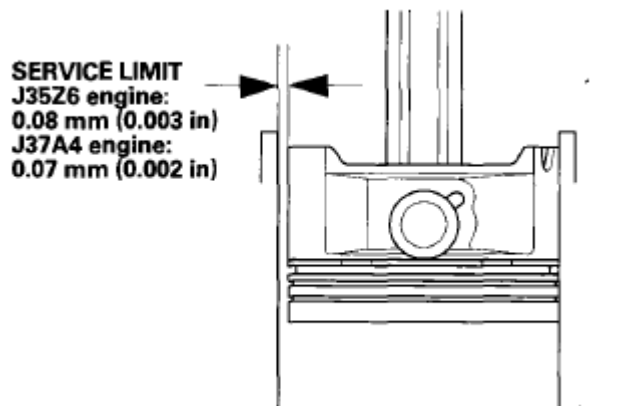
Identifying Difference Between Cylinder Bore Diameter And Piston Diameter
